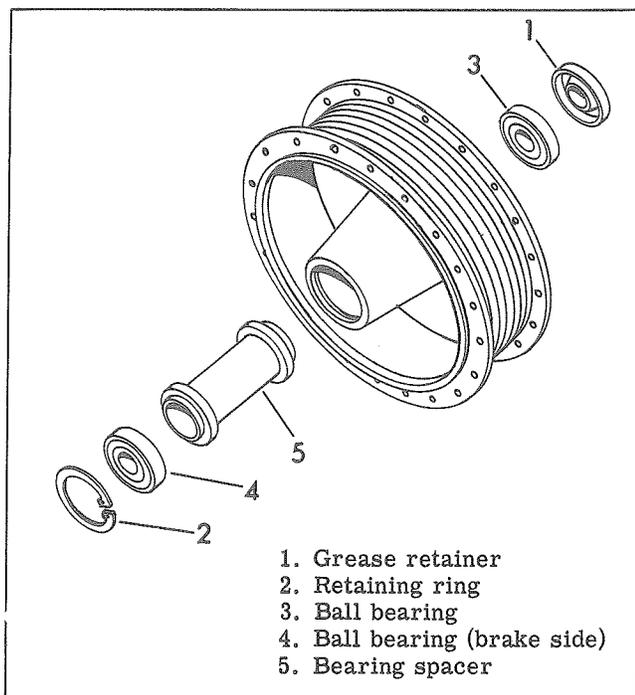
C-11A. Front Wheel Hub (1964 And Later)
